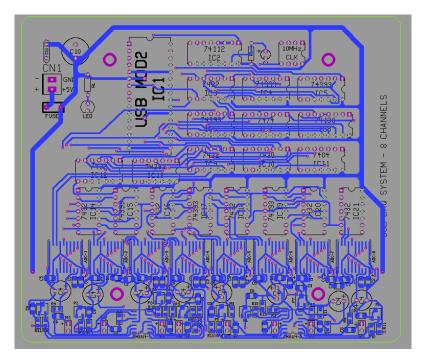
CirCAD drawing of the USB-DAQ8's top layer.
